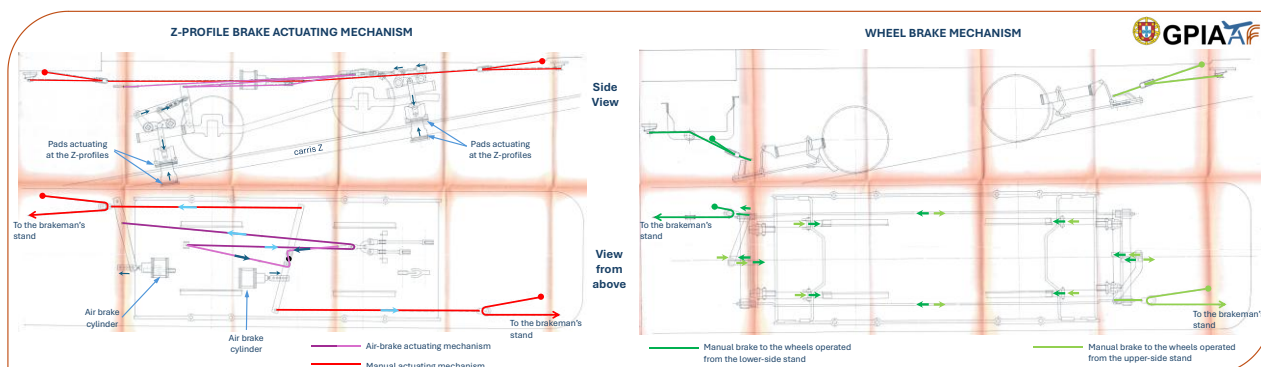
Diagrams illustrating the brakes' actuating mechanisms.
